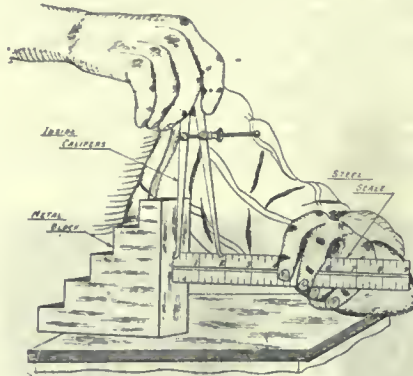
METHOD OF READING INSIDE CALIPER SETTING
